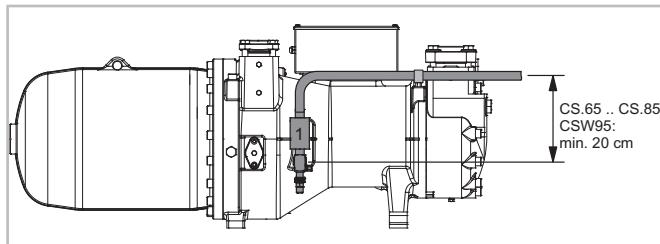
Pipe layout of the ECO suction gas line at the compressor
